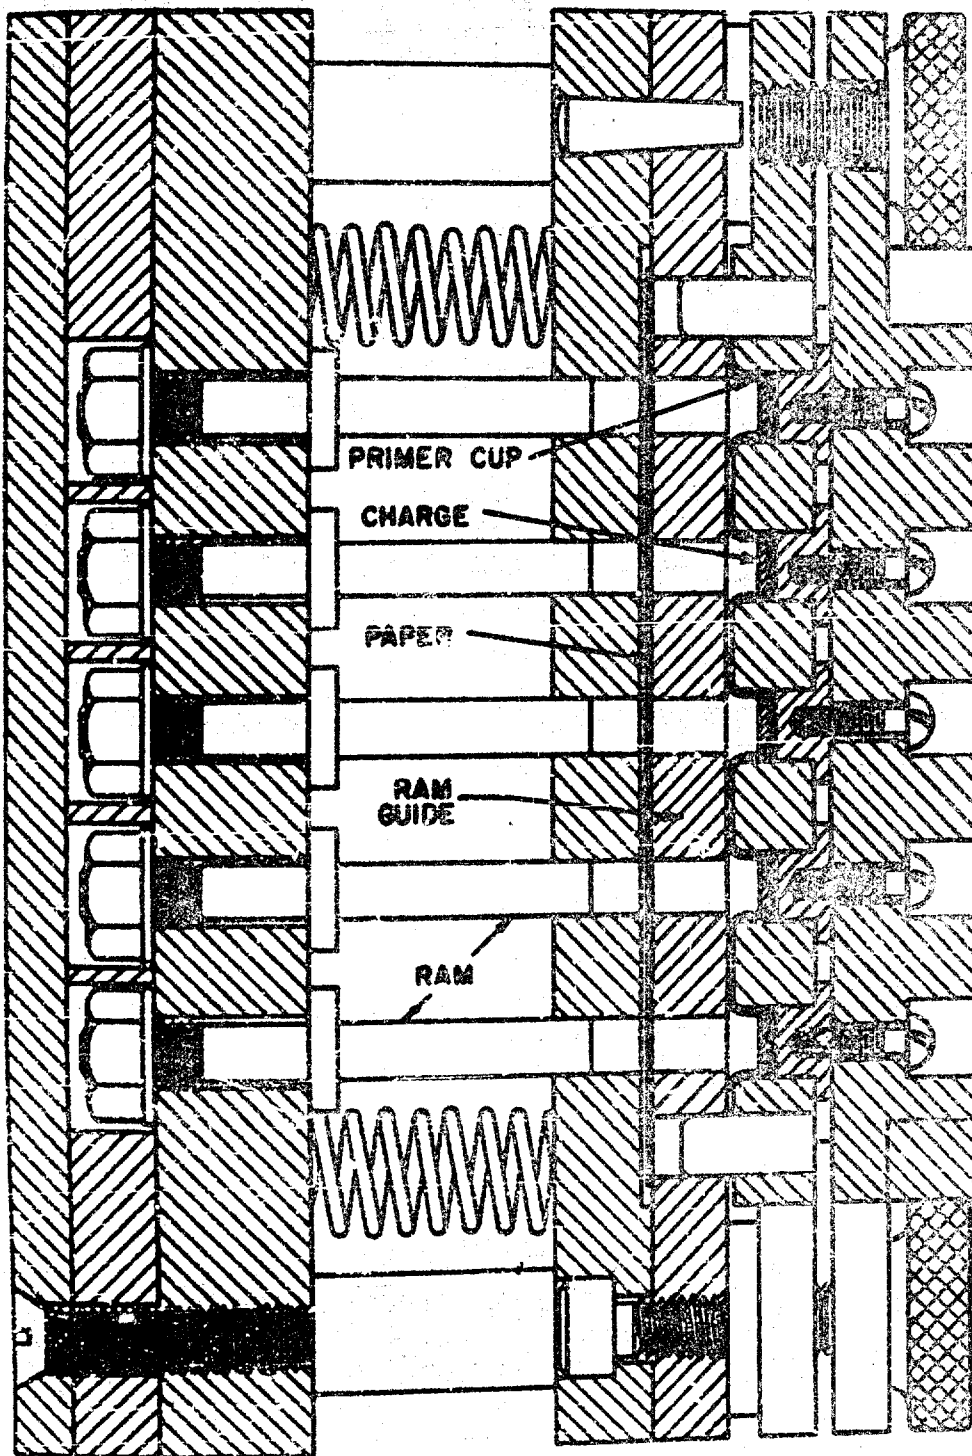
Primer Vee-Loading Tool, Semi-Production Type. Sectional View.
